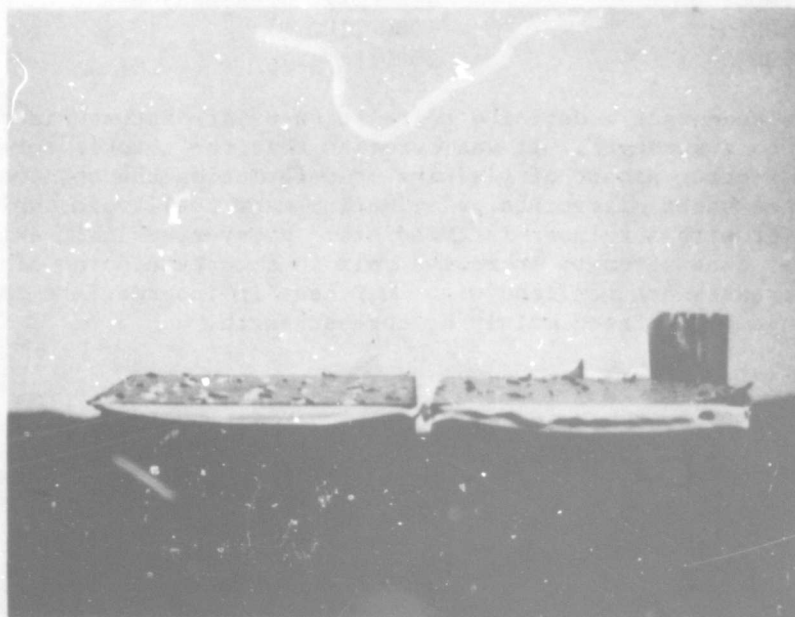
FAILED SURFACE OF TENSION TEST SPECIMENS SHOWING
